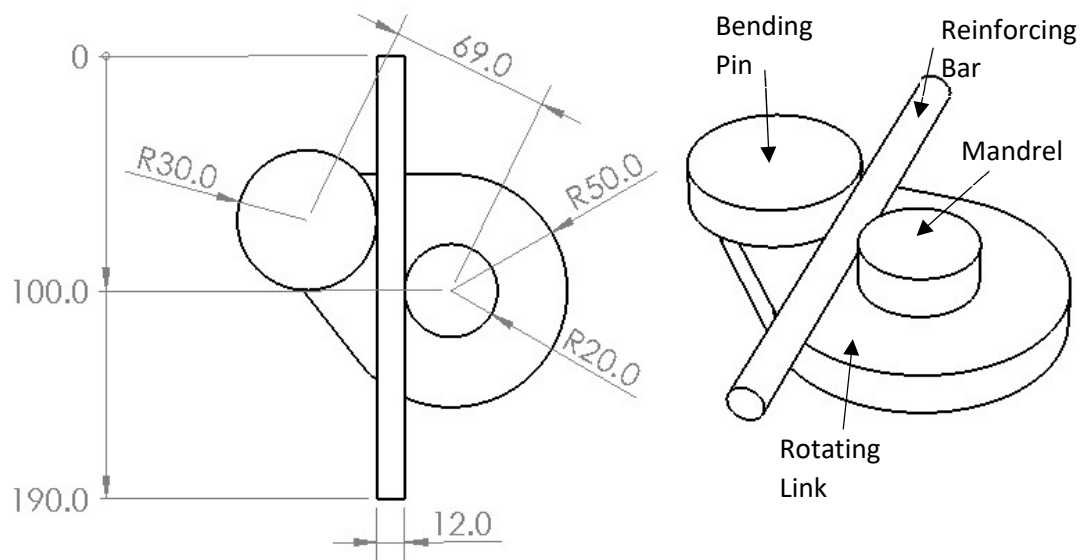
Model geometry of ALB machine in the starting position with key dimensions shown, created using Solidworks. The top view (left) and isometric view (right) are shown. A round bar, 190 mm long, is held between a mandrel and bending pin, which are connected by a rotating link.
